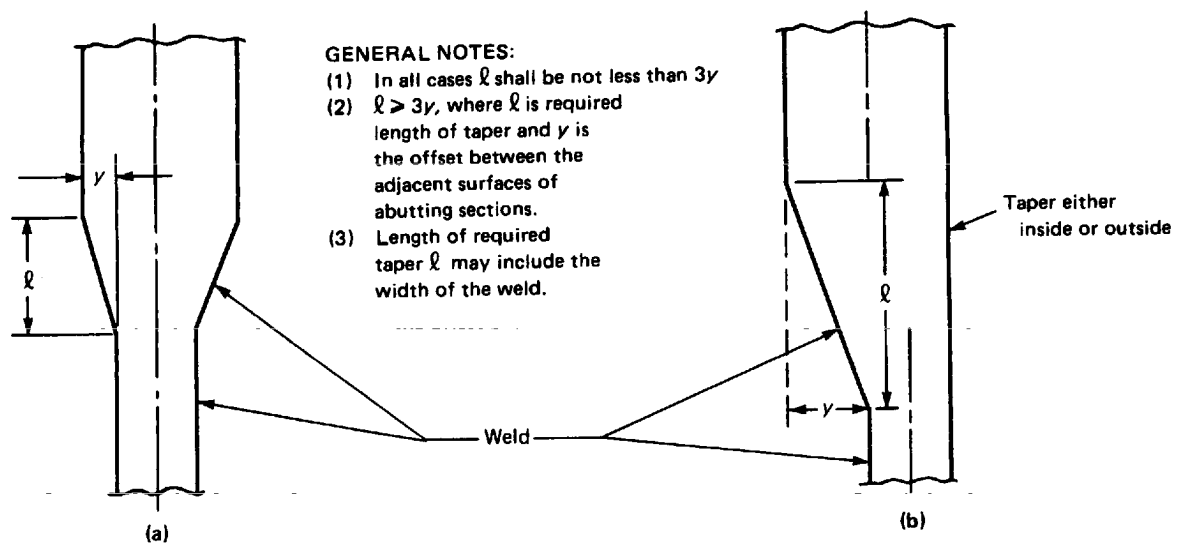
BUTT WELDING OF PLATES OF UNEQUAL THICKNESSES
